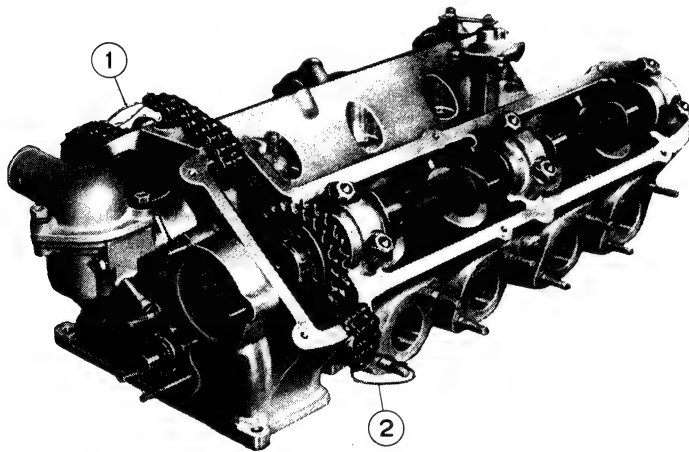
Timing chain opened for tappet clearance adjustment (engine 118 B.000).
